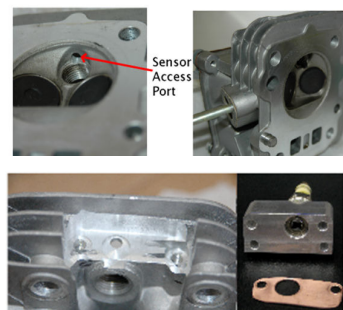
Modified Chicago Generator Chicago Generator Engine test engine cylinder head (Top), the black circles are the valves. SiC MEMS Sensor access port (Lower-Left) into the Sparkplug adapter block with Pt sensor and copper gasket (Lower-Right).
